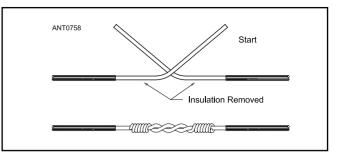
Correct method of splicing antenna wire. Solder should be flowed into the wraps after the connection is completed. After cooling, the joint should be sprayed with acrylic to prevent oxidation and corrosion.
